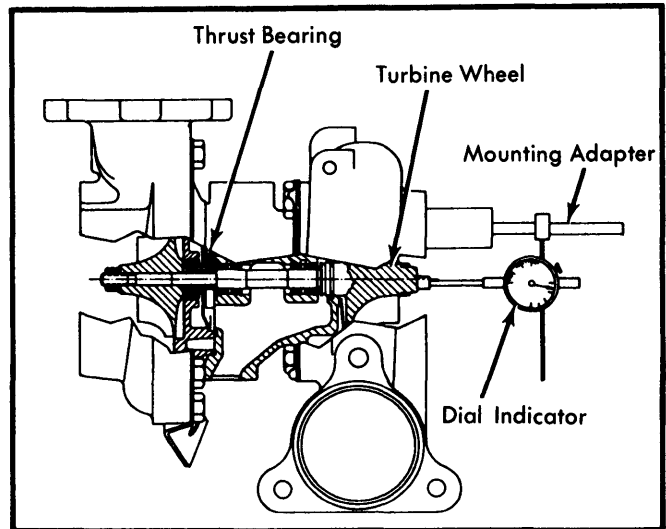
Checking Thrust Bearing Axial Clearance With Dial Indicator
